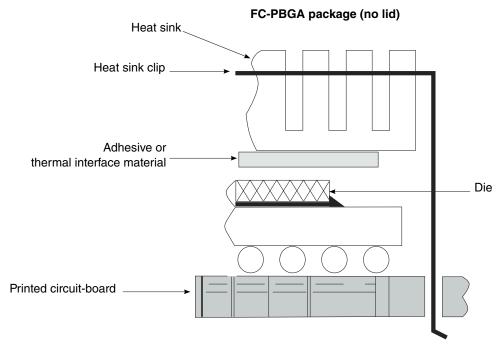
Package exploded, cross-sectional view-FC-PBGA (no lid)
